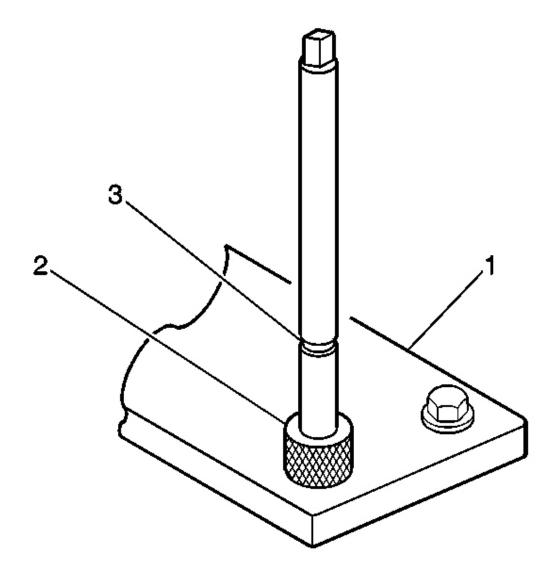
View Of Fixture Plate, Drill Bushing & Tool Marking Courtesy of GENERAL MOTORS CORP.
